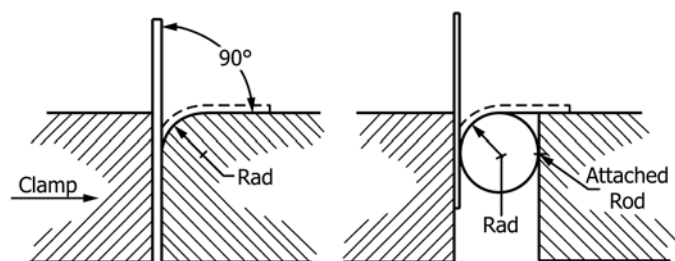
Methods for Clamping Specimen to Radius for Bend Test
